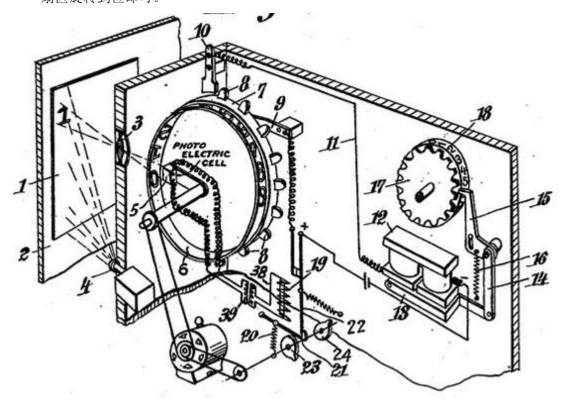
The patent drawing of Reading Machine of Gustav Tauschek
